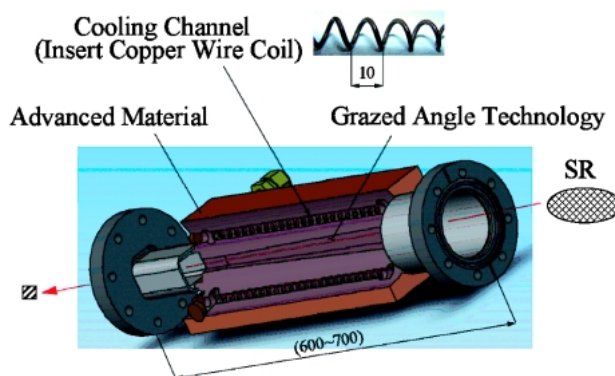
Typical schematic drawing of a high-heat-load-component using the grazed angle technology.
